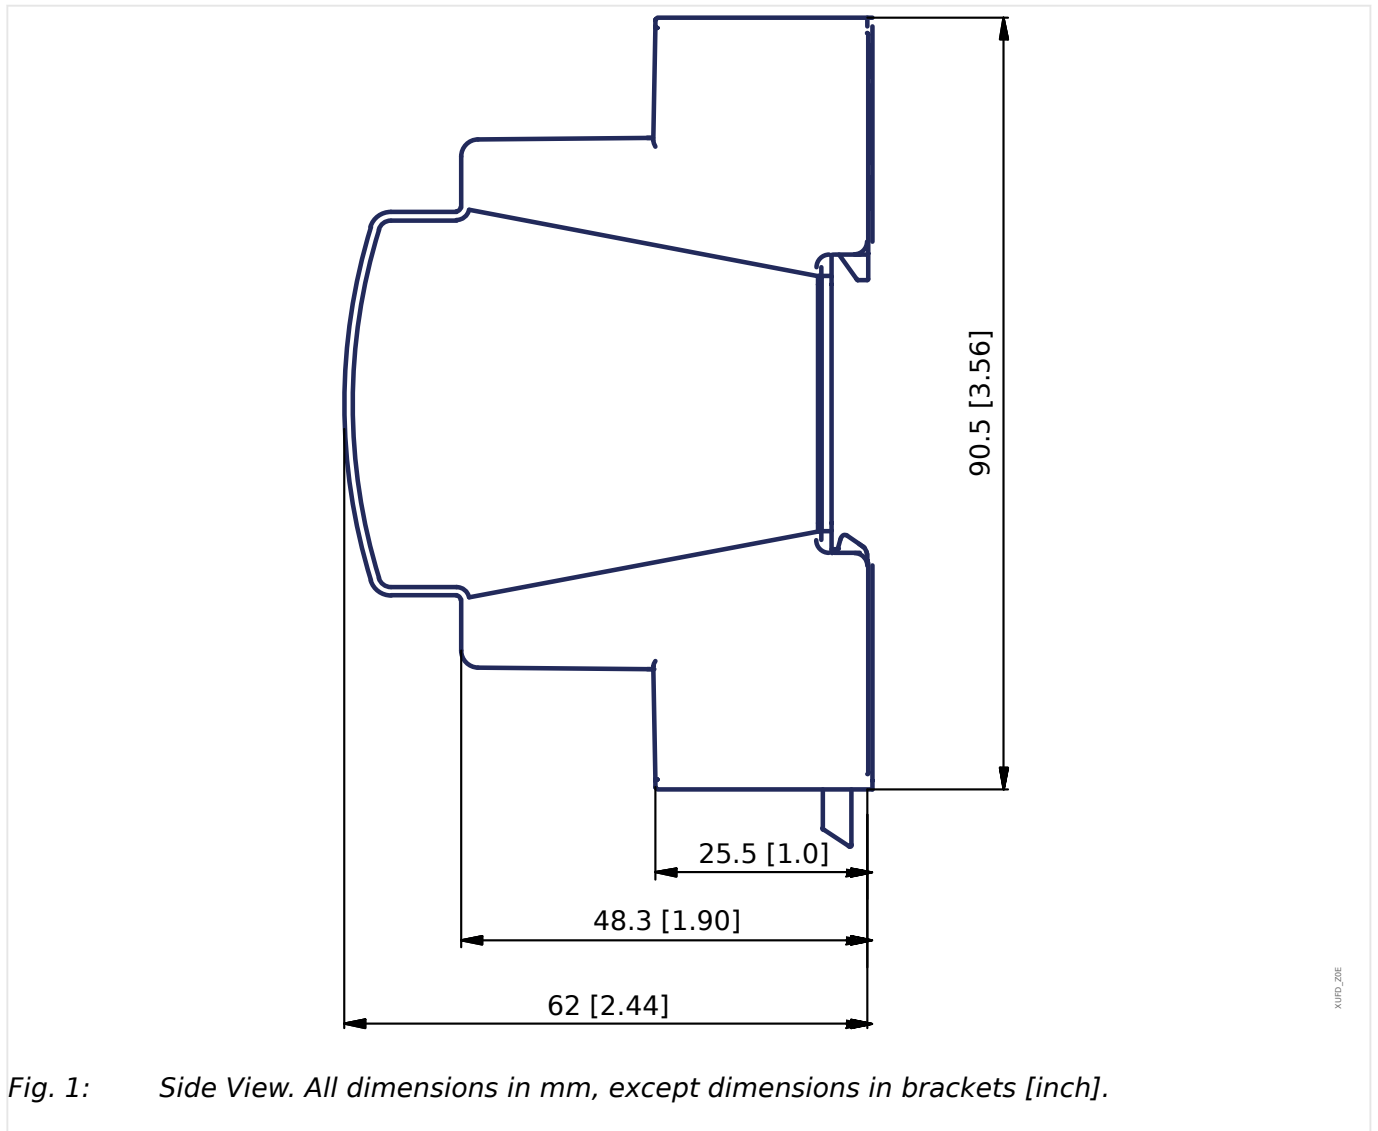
Side View. All dimensions in mm, except dimensions in brackets [inch].
